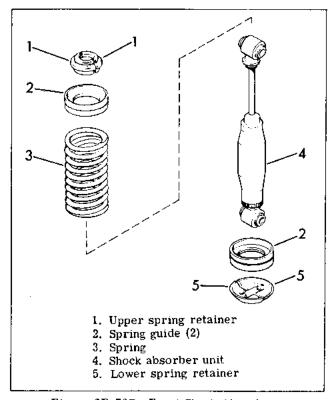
F-78D. Front Shock Absorber, 4 Wheel Car - Exploded View
